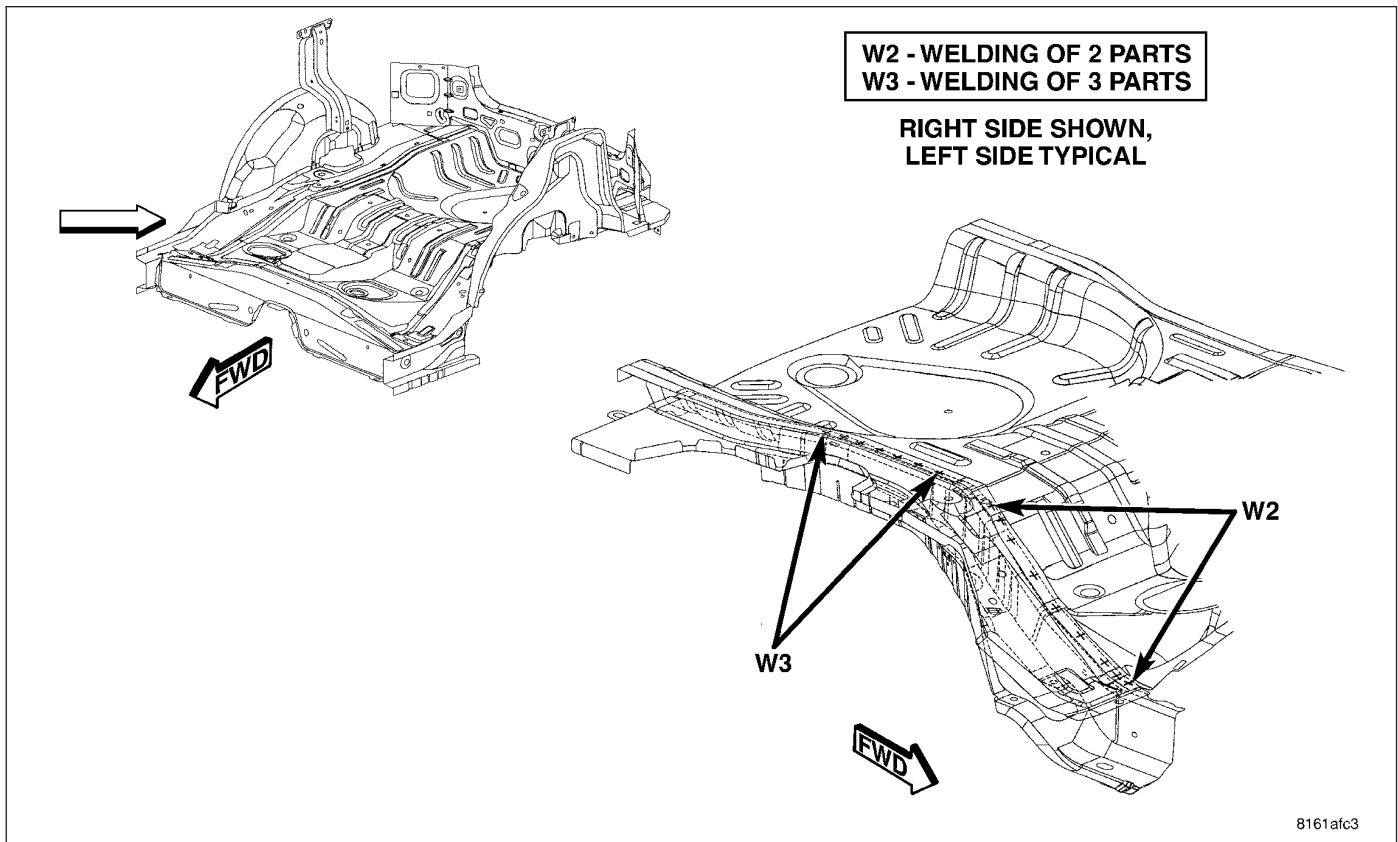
REAR FLOOR ASSEMBLY (5 OF 14)
